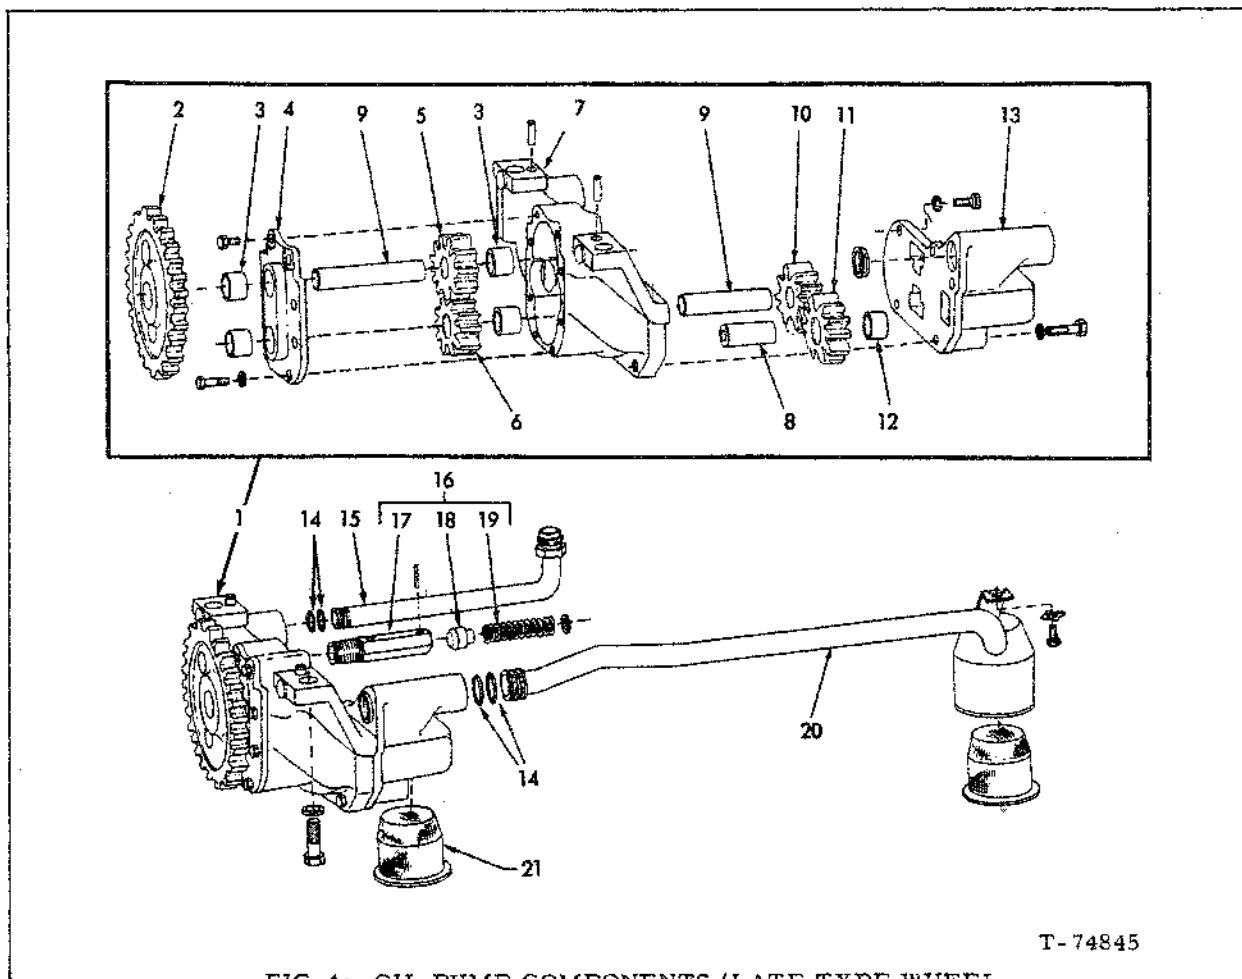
OIL PUMP COMPONENTS (LATE TYPE WHEEL LOADERS AND CRAWLER LOADERS)
